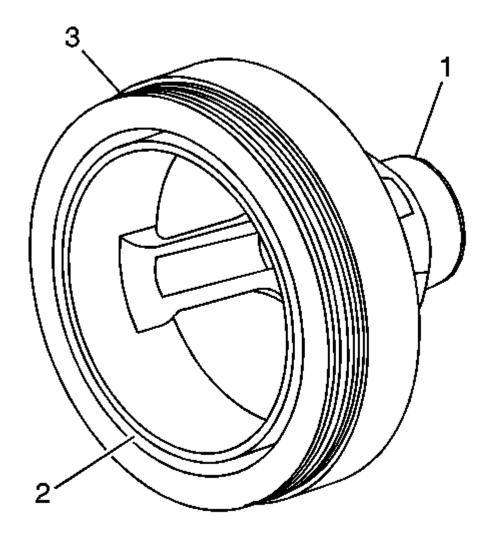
Inspecting Crankshaft Balancer Courtesy of GENERAL MOTORS CORP.
